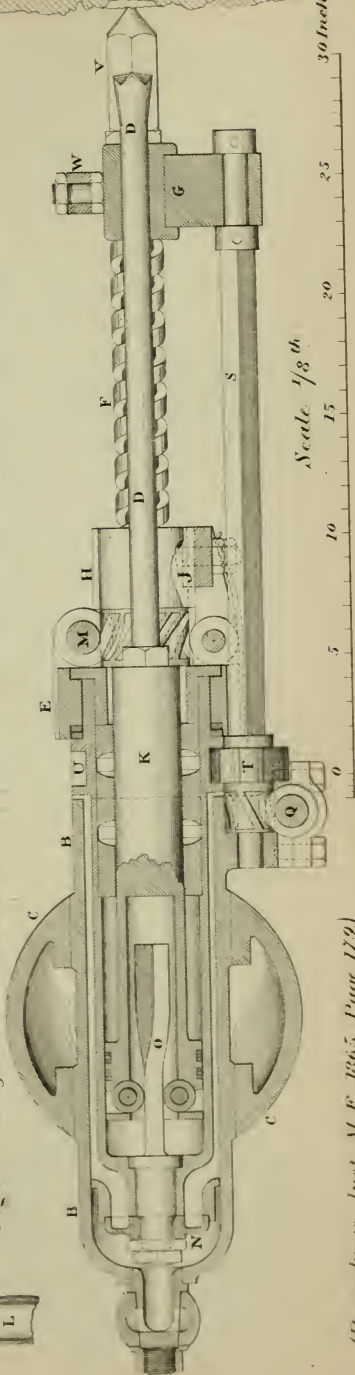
Sectional Plan, showing Working Cylinder advanced as the Hole progresses.
